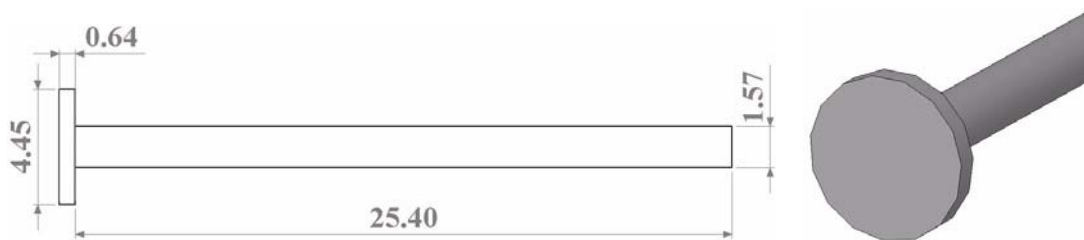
Drawing of the Faraday probe collector. The collector diameter is 4.45mm. The metallic rod attached to the back of the collector is used to apply a voltage bias and conduct current to the power supply. All dimensions are in millimeters.
